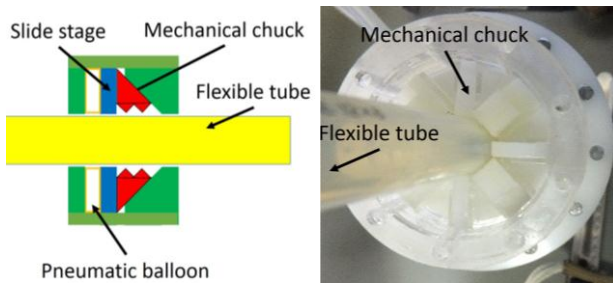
Schematic diagram of inner construction and view of pneumatic chuck using balloon and mechanical chucks.
